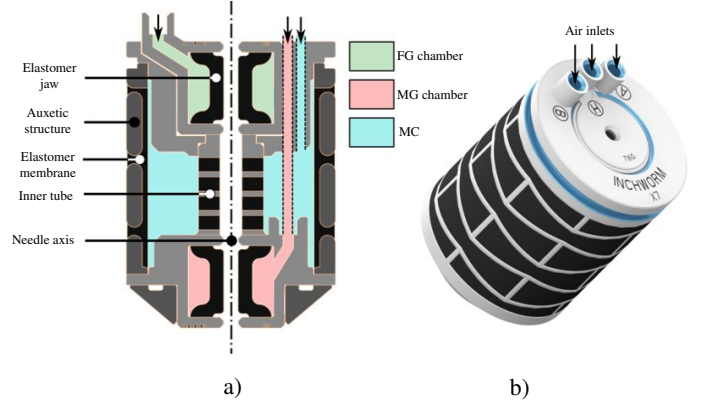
CAD DESIGN OF THE ACTUATOR: a) CROSS SECTIONAL VIEW, b) FULL VIEW.
